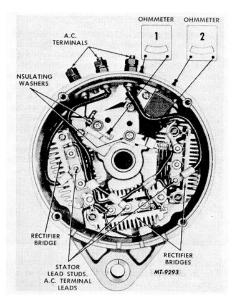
End Frame View with Stator Removed (Three Rectifier Bridge Type)
